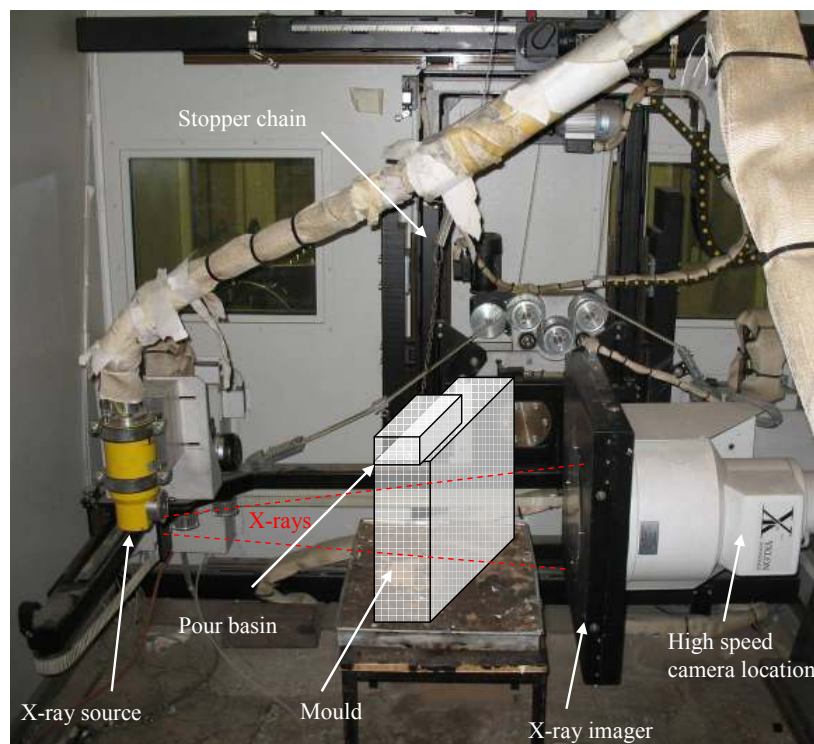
A photograph showing the X-ray casting unit located in the Metallurgy and Materials Department, The University of Birmingham.
